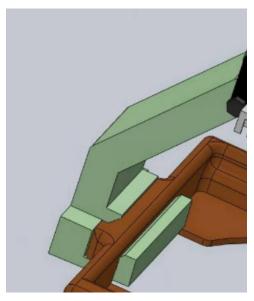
Attachment mechanism used in the 2019-2020 Palm Print design
